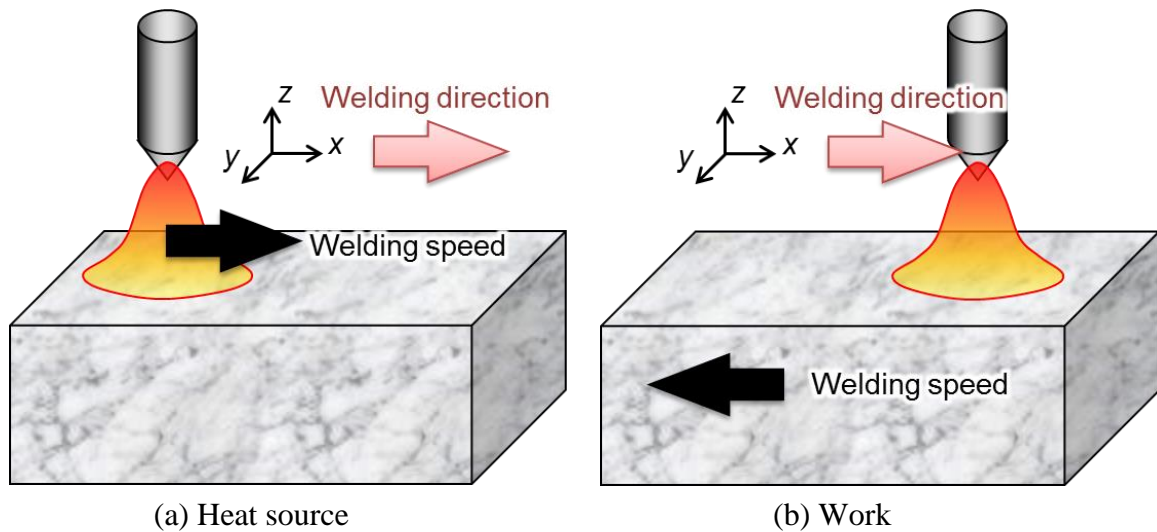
Illustration of welding by moving heat source and work
